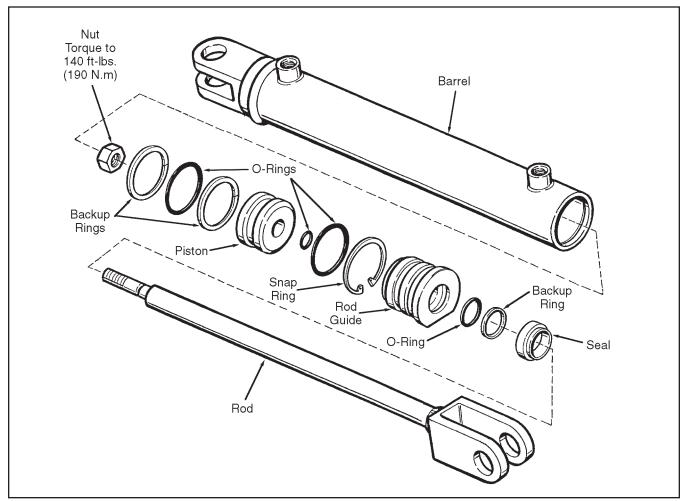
G-1. Box Cylinder Disassembly and Reassembly
